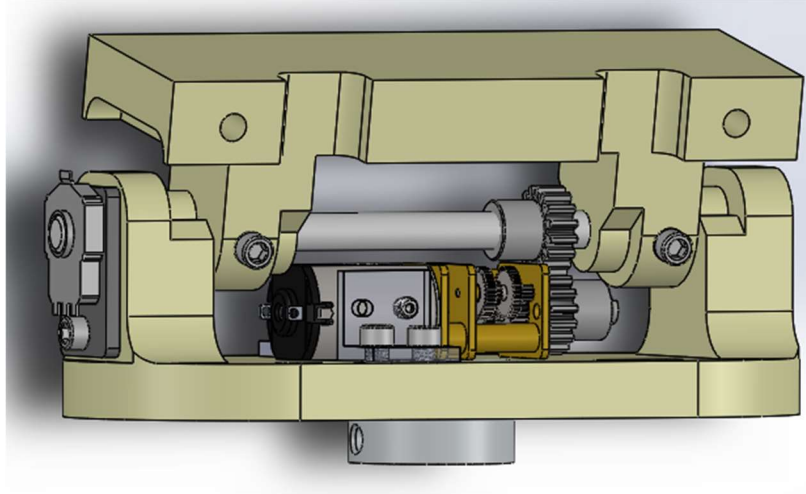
Side view of the wrist: upper link connects to the palm while the bottom link connects to the z-axis motor shaft.
